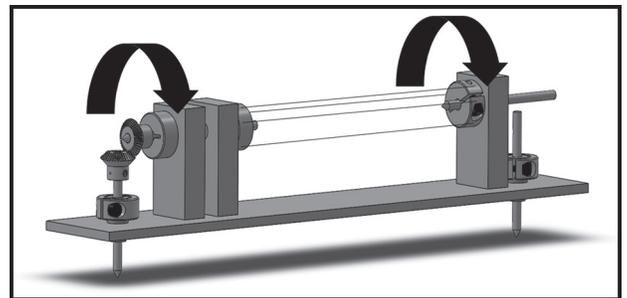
Rotating deposition lathe designed for vacuum sputtering system.
